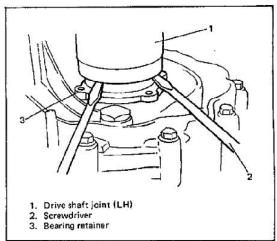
A-11 Detaching Left Side Drive Shaft Joint from Differential Gear
